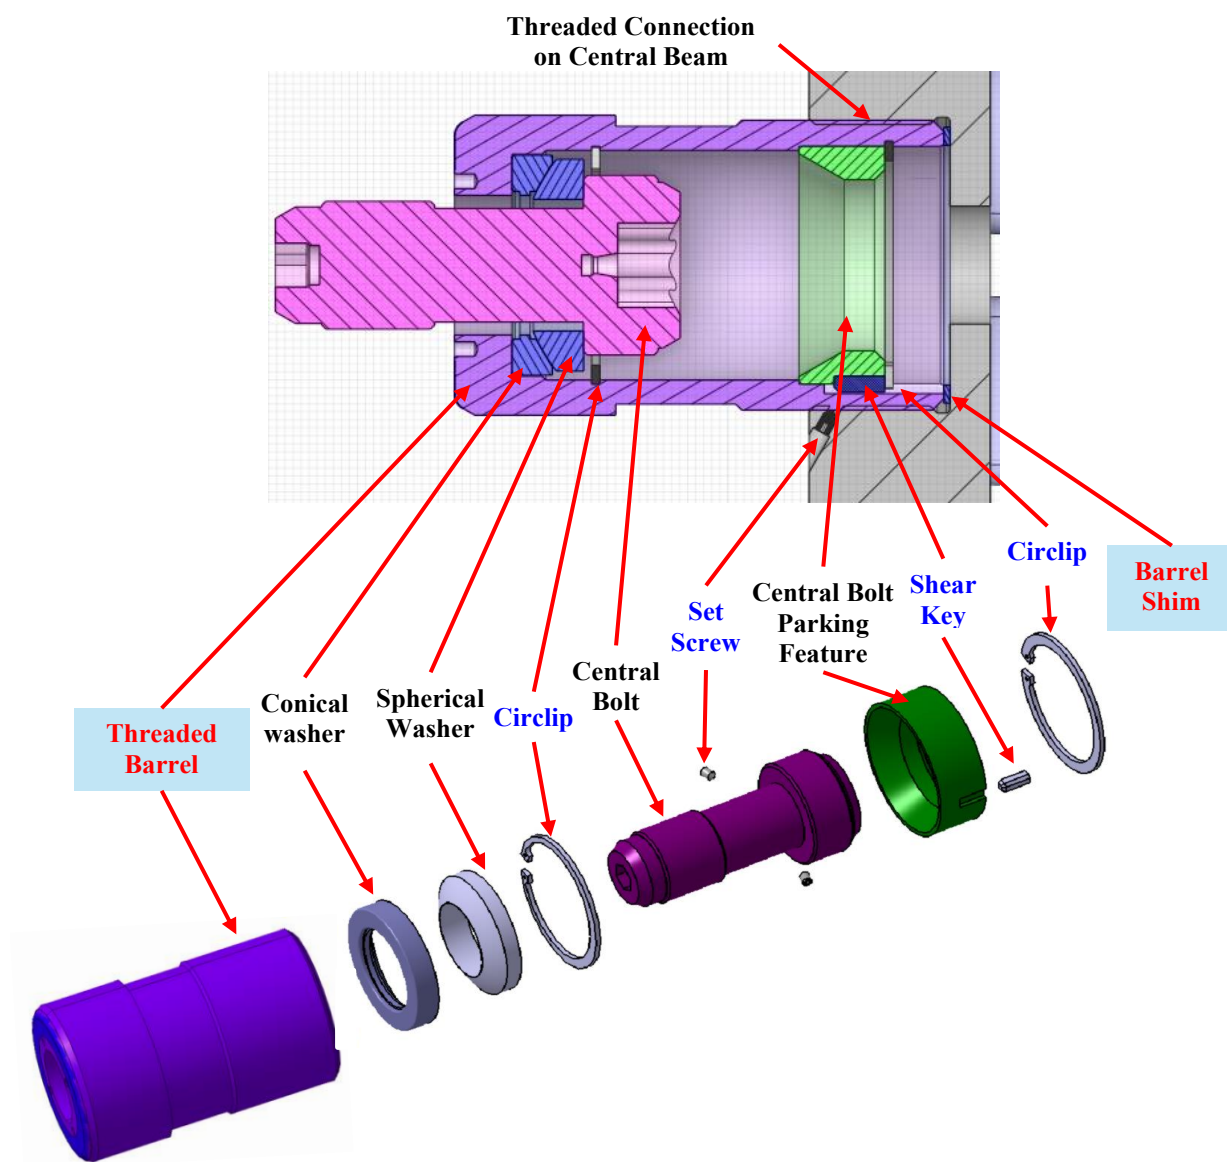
Central Bolt assembly and Threaded Barrel assembly
